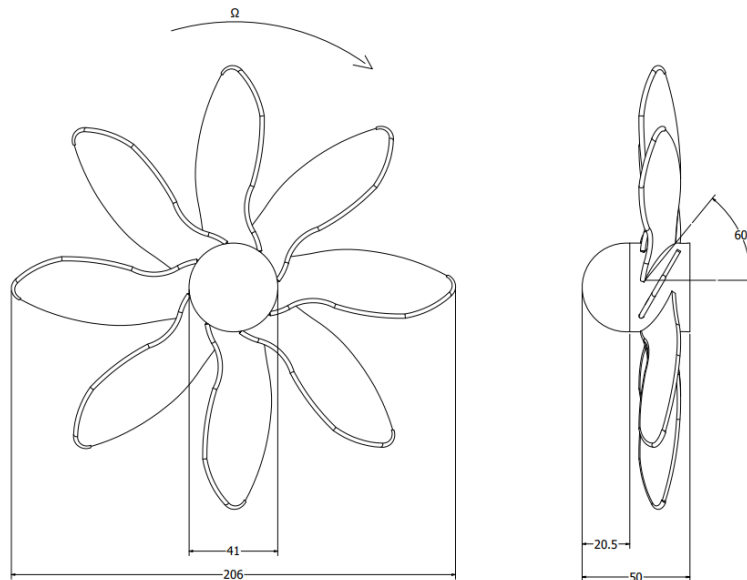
Technical drawing of Model 1.4. Dimensions in mm.
